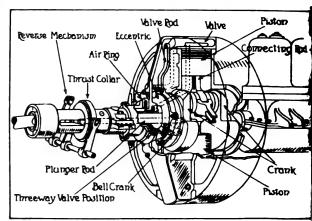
Prather Pneumatic Clutch Construction Storing and Utilising Compressed Air.
